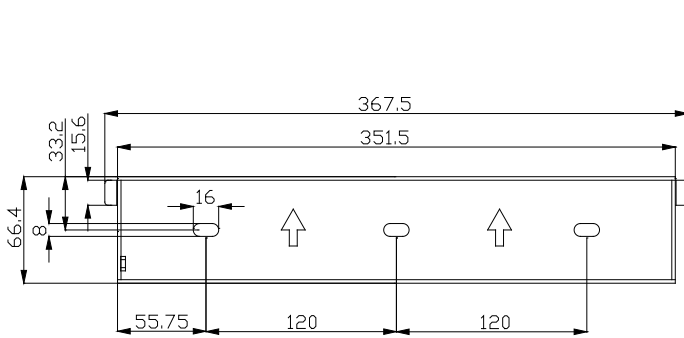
Dimensions of rear panel of R5-7K/8K-S2
